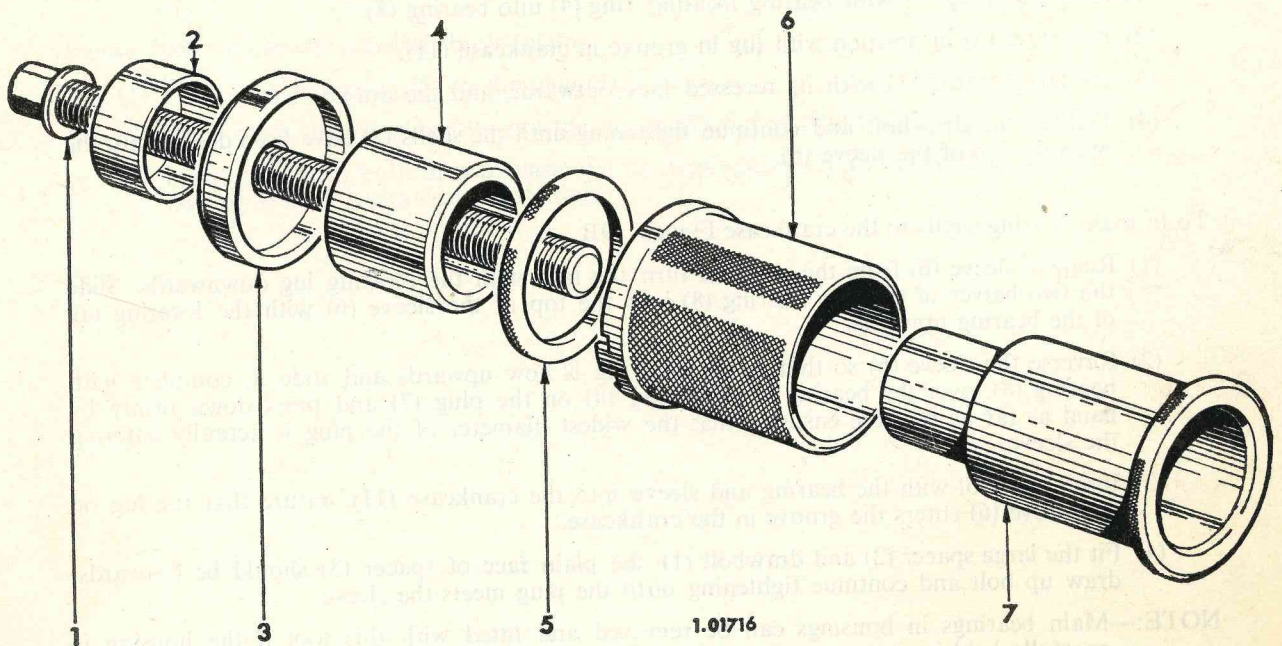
C.—Main Bearing Tool Complete—Part No. 317-84
